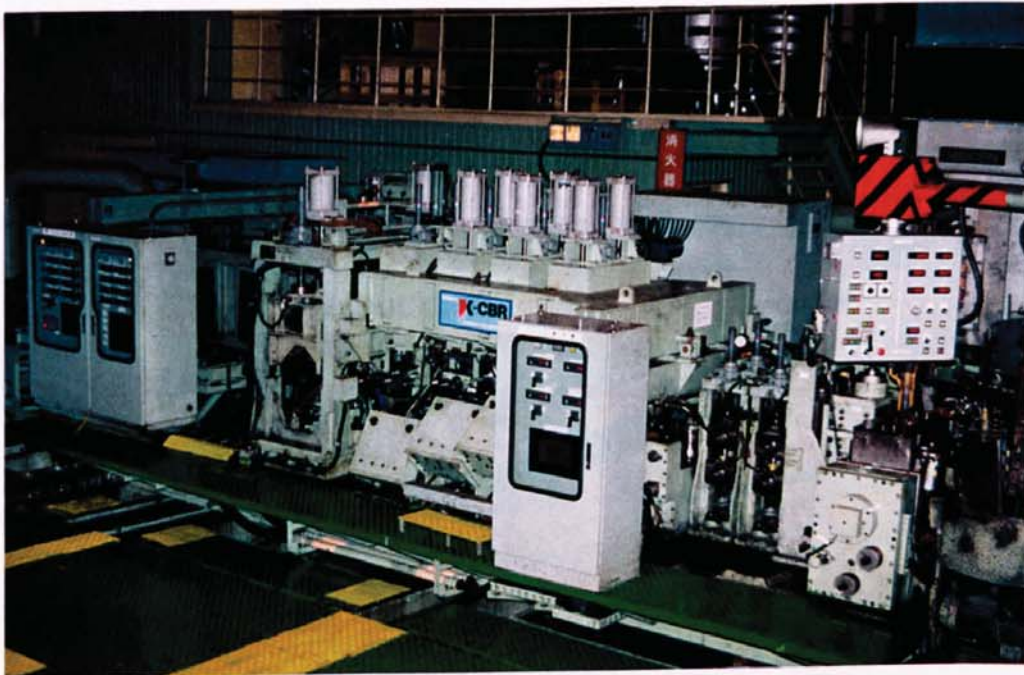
Appearance of the CBR forming mill for manufacturing ERW stainless steel tube at the Chita works
